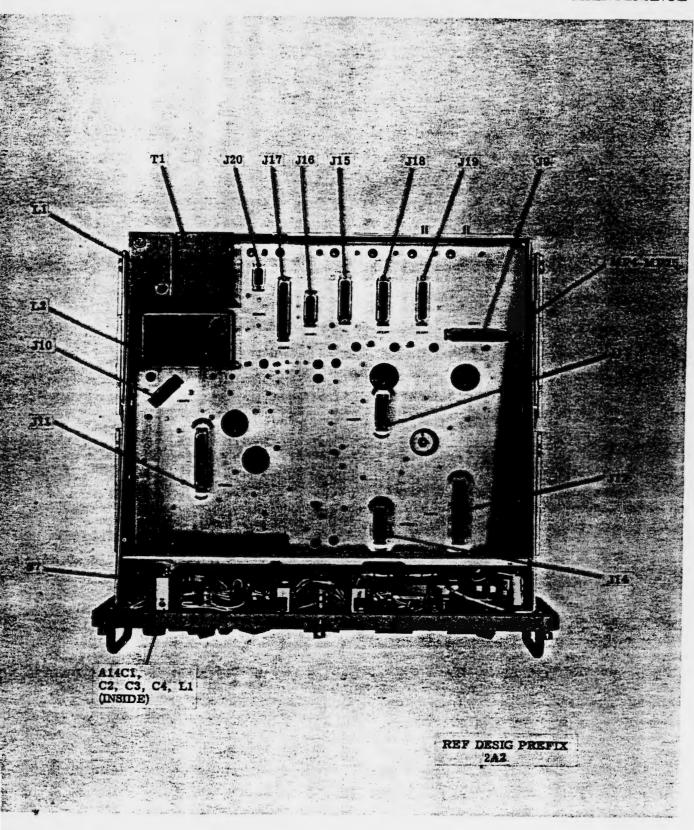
Radio Transmitter T-827 URT, Chassis, Top View
